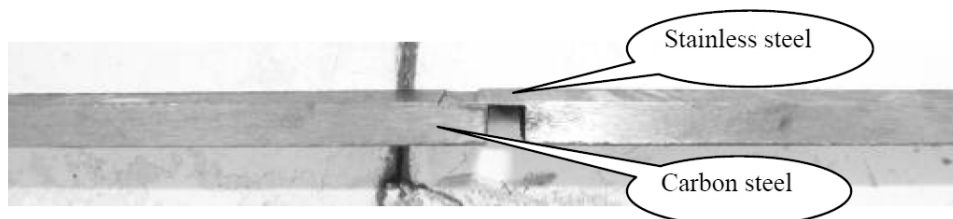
Specimen of stainless steel clad plate after pull shear.
